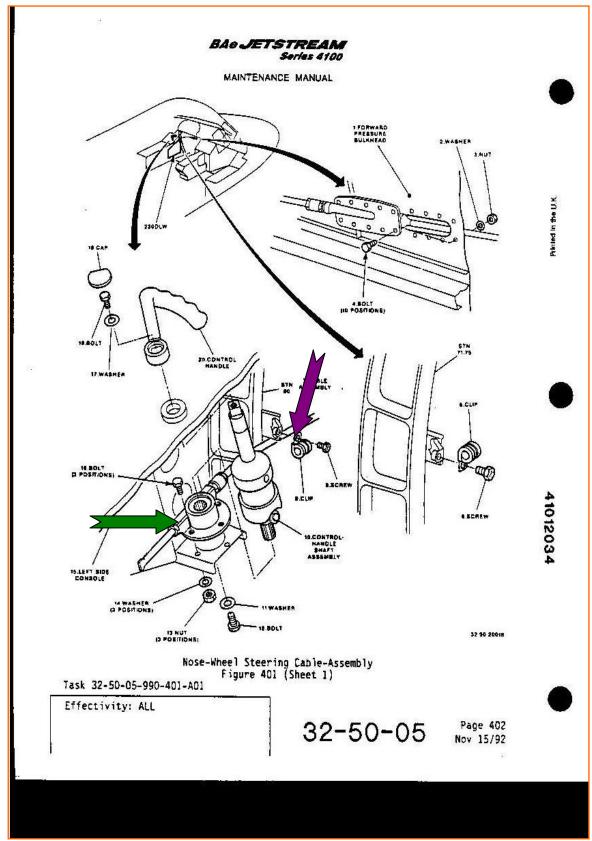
An exploded view of the Nose-wheel Steering Cable assembly, showing the position of the Steering Control Box (Green arrow) and the Steering Control Cable (Purple arrow).
